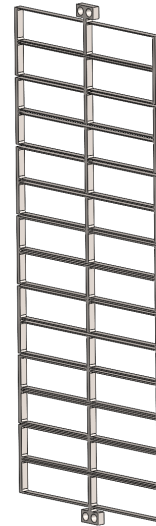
The physical prototype used for the tests. The attachment points can be seen on the top and bottom.
